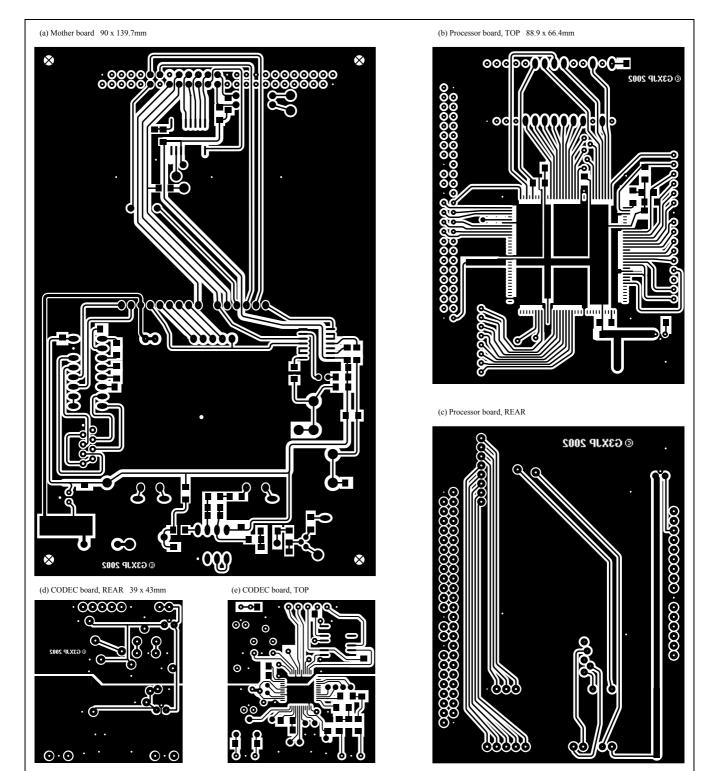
DSP boards PCB artwork. NB all these images are mirrored for direct copying to laser film. Should you wish to use an indelible pen to apply the artwork to the back of the daughter boards, the image needs to be flipped (or simply viewed in a mirror). All holes are 0.7mm.
